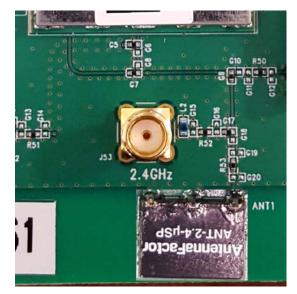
FCC and ISED approved trace design layout and picture for the uSplash antenna of section 4.2.2
